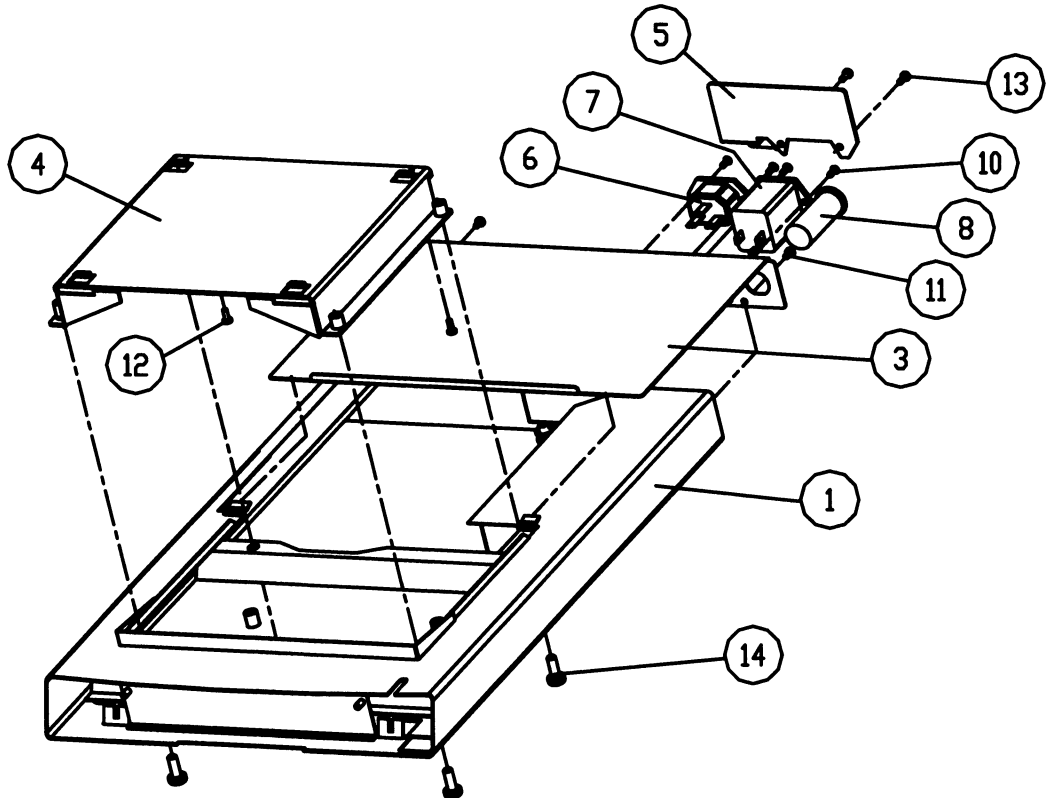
Exploded view, Video Display, D-VHC17, rev.02
